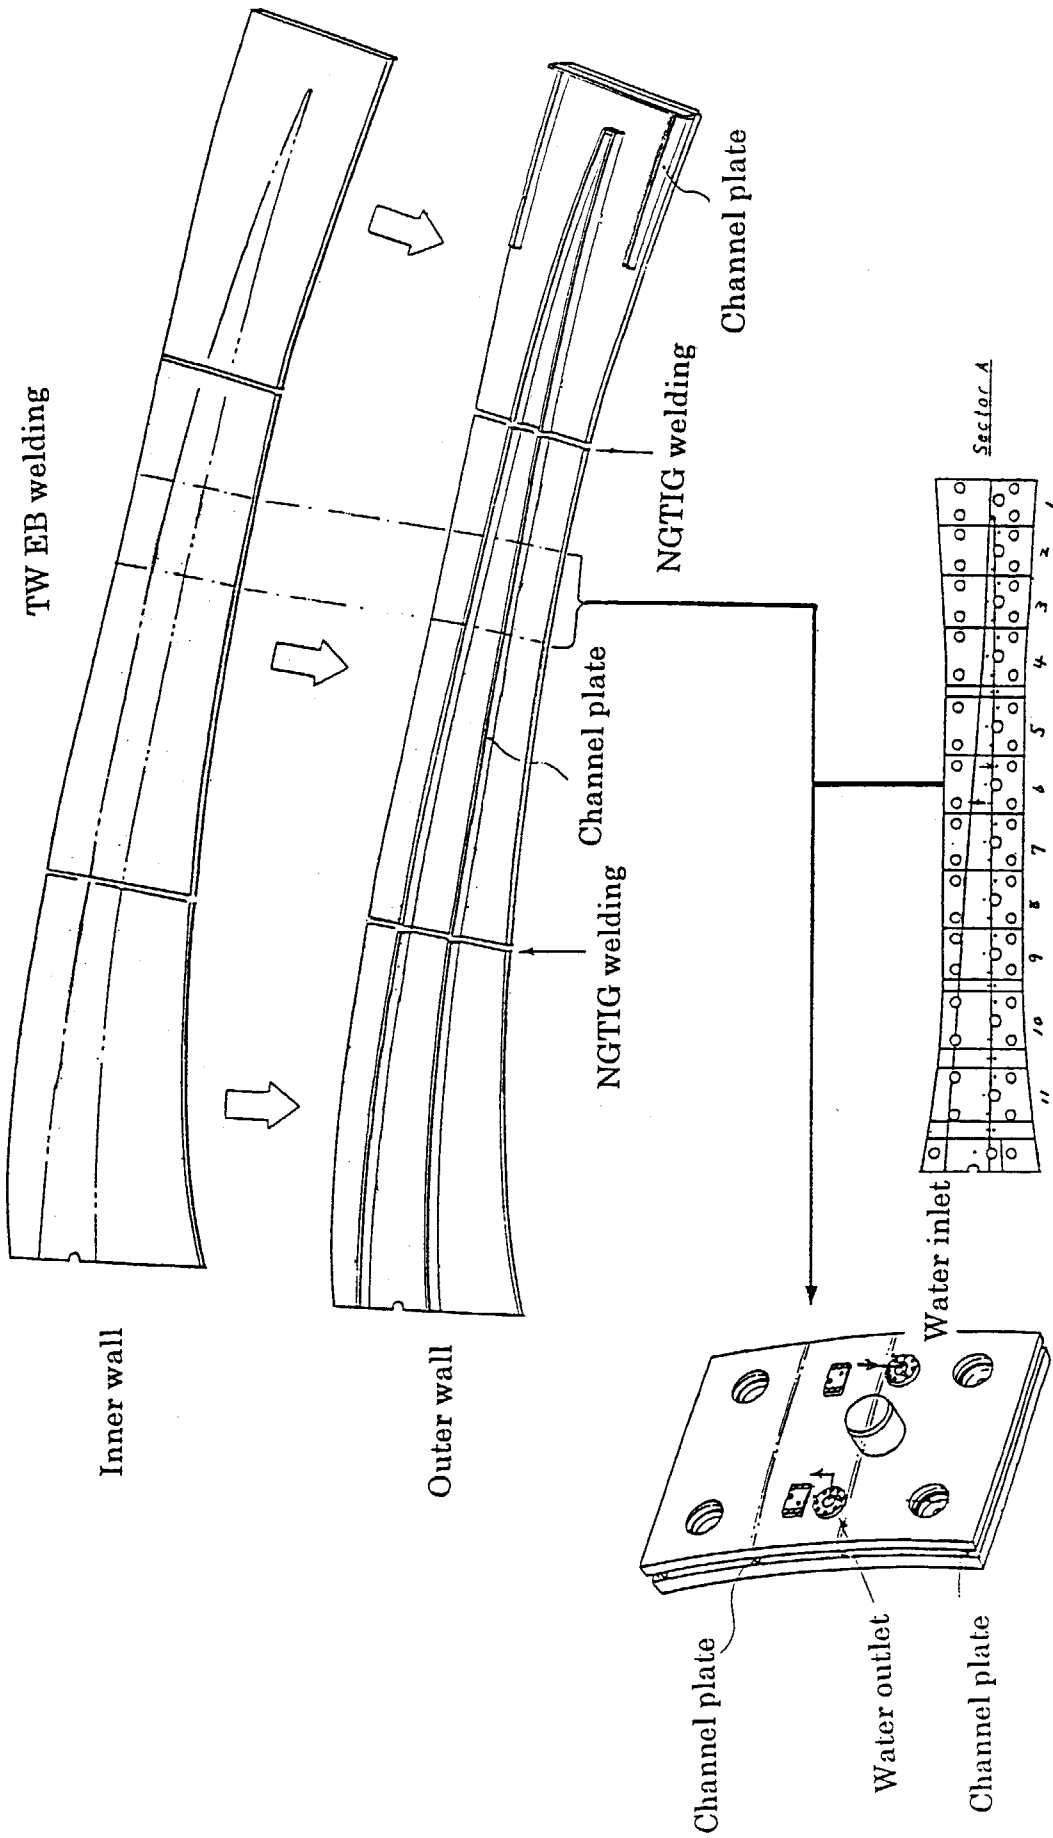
Fundamental structure of inboard blanket back plate.
